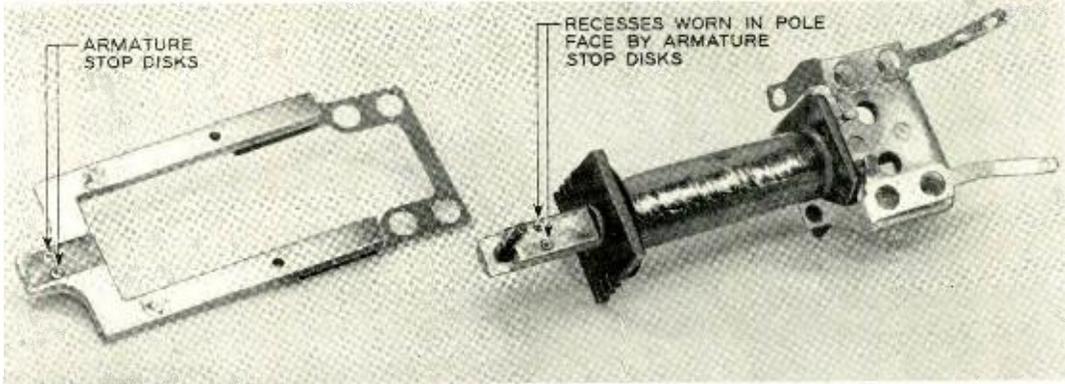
Wear of the stop pins and core pole-face after 50 million operations.
